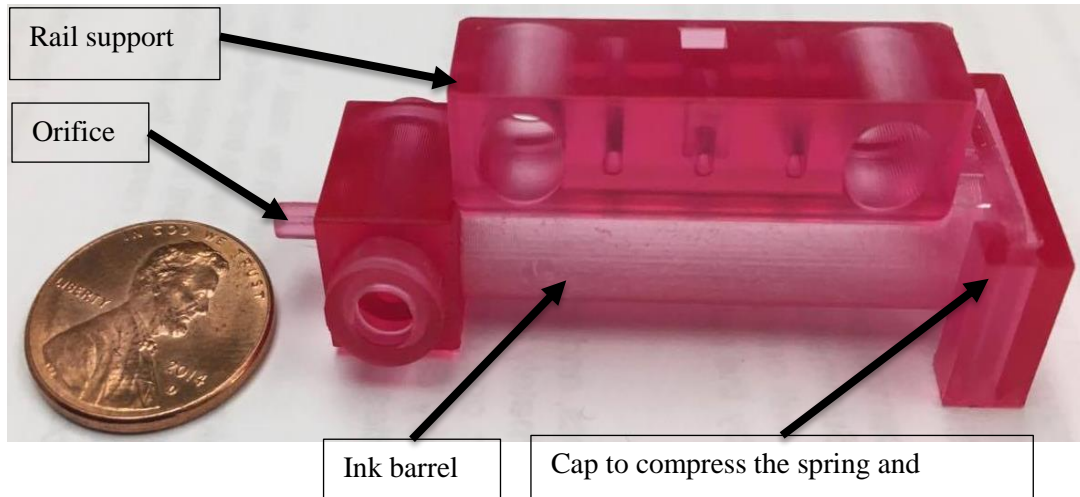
A SL printed (ProtoTherm) functional prototype of the micro dispenser. Length of the dispenser is 65mm, inside diameter of the ink barrel 8.66mm.
